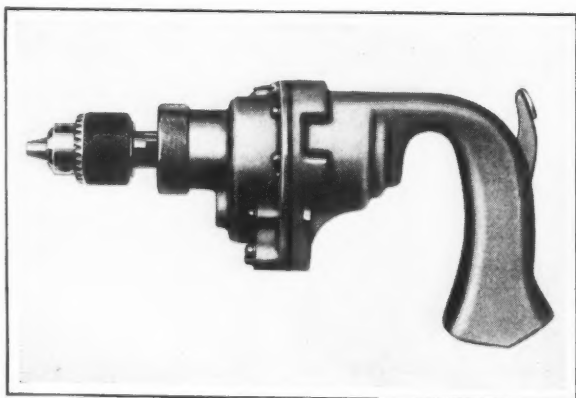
Rotor Drill Manufactured in 1/4-, 5/16- and 3/8-inch Models
